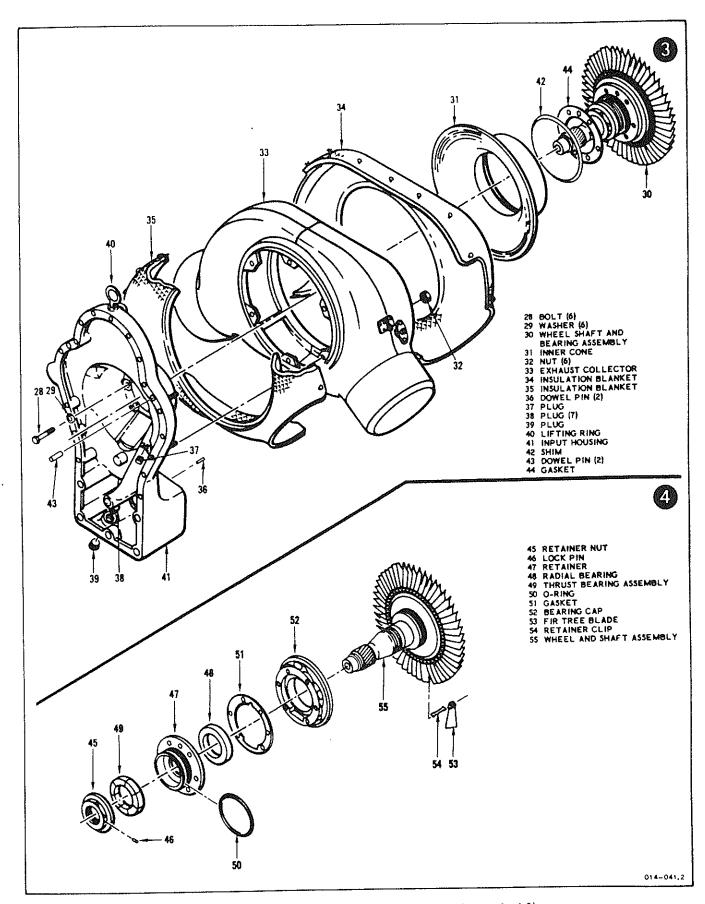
Reduction Unit, Exploded View (Sheet 2 of 3)
